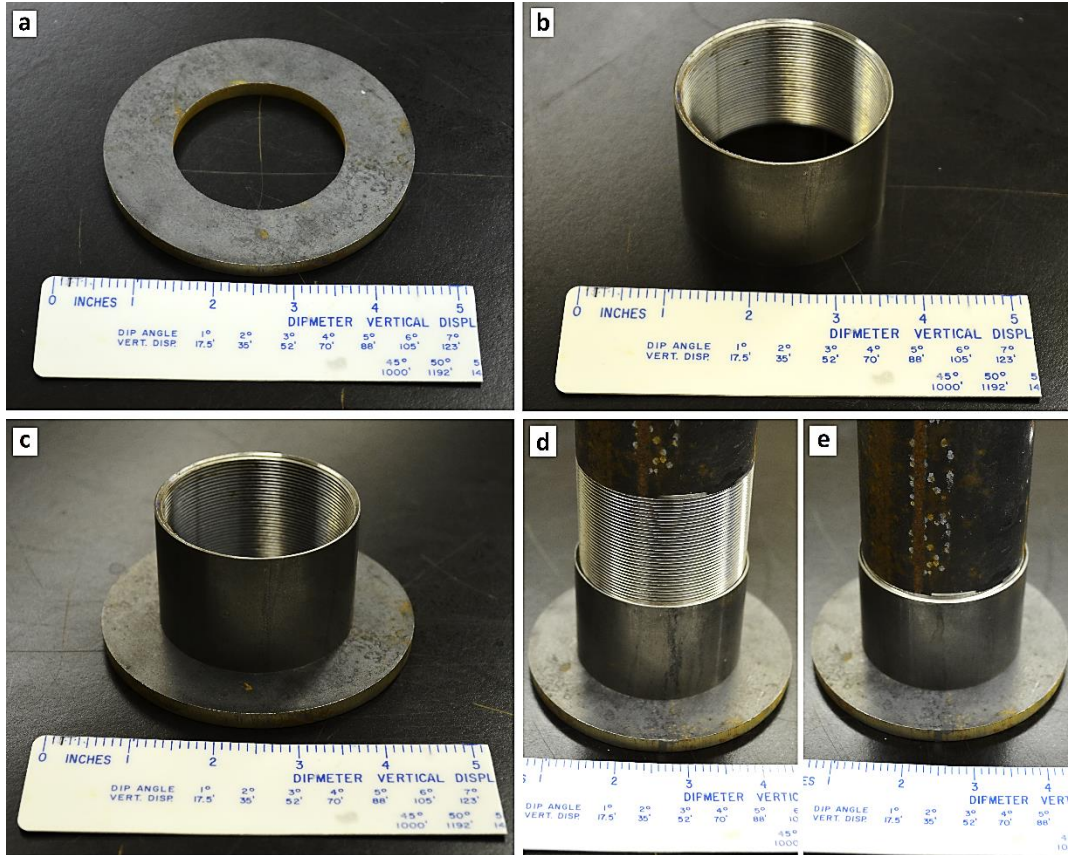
Metal components of the bottom part of the composite sample: a. quarter-inch steel plate ring; b. 2.5-inch (6.35-cm) OD steel pipe coupling; c. pipe coupling welded onto steel plate ring; d. threaded part of the inner pipe being screwed into the pipe coupling; e. finished assembly. Final part of the composite sample is the outer pipe which is placed at the end and welded for the steel plate ring on the outer region.
